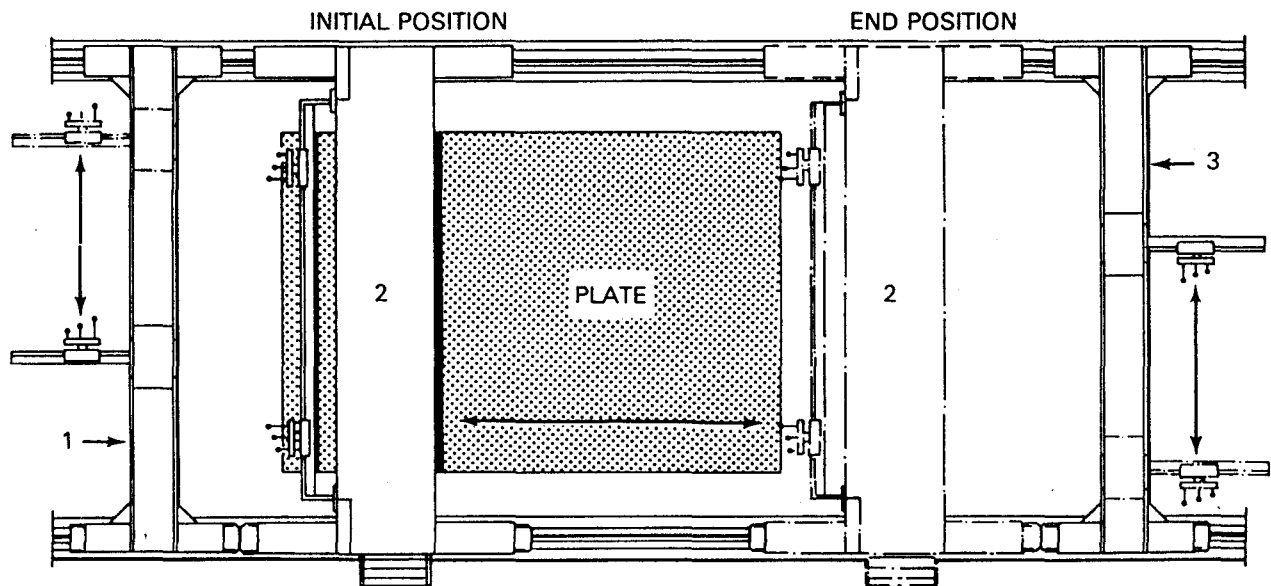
Plan View of a Three-Gantry Cutting Machine
